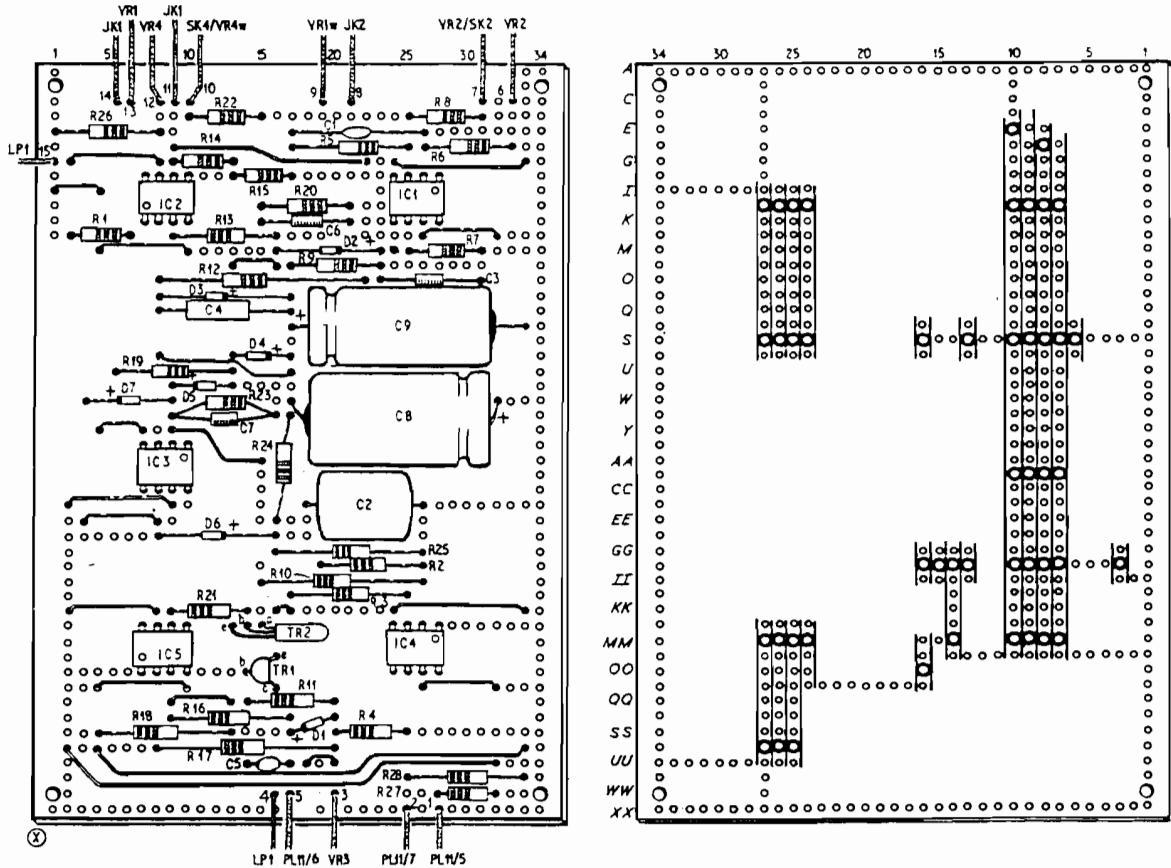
Component layout and wiring of Sample and Hold Board
